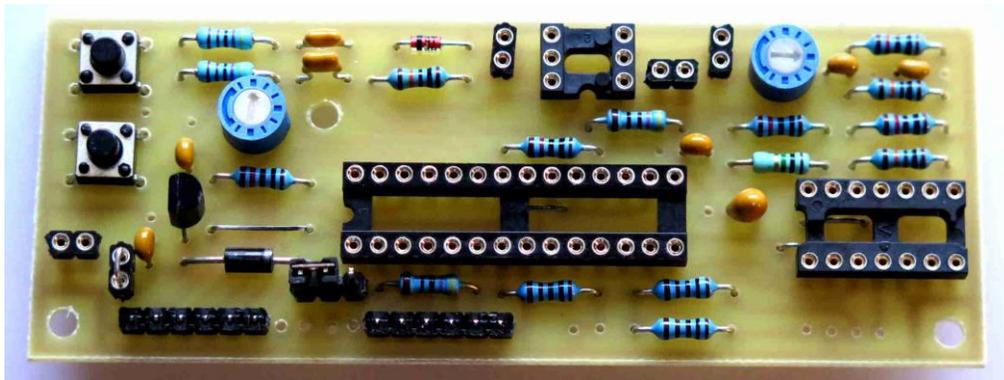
The card is almost finished, there remains the assembly of 3 LED side tracks.
